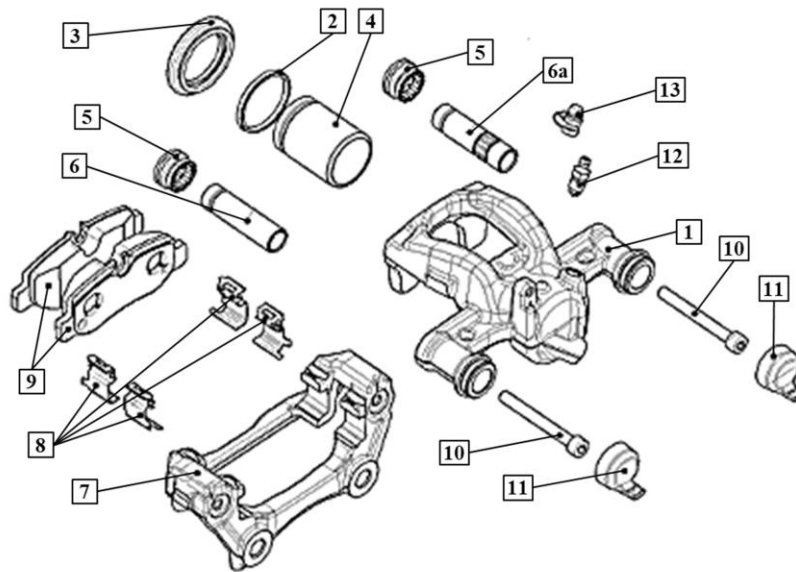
Single cylinder single cylinder disc caliper parts diagram
